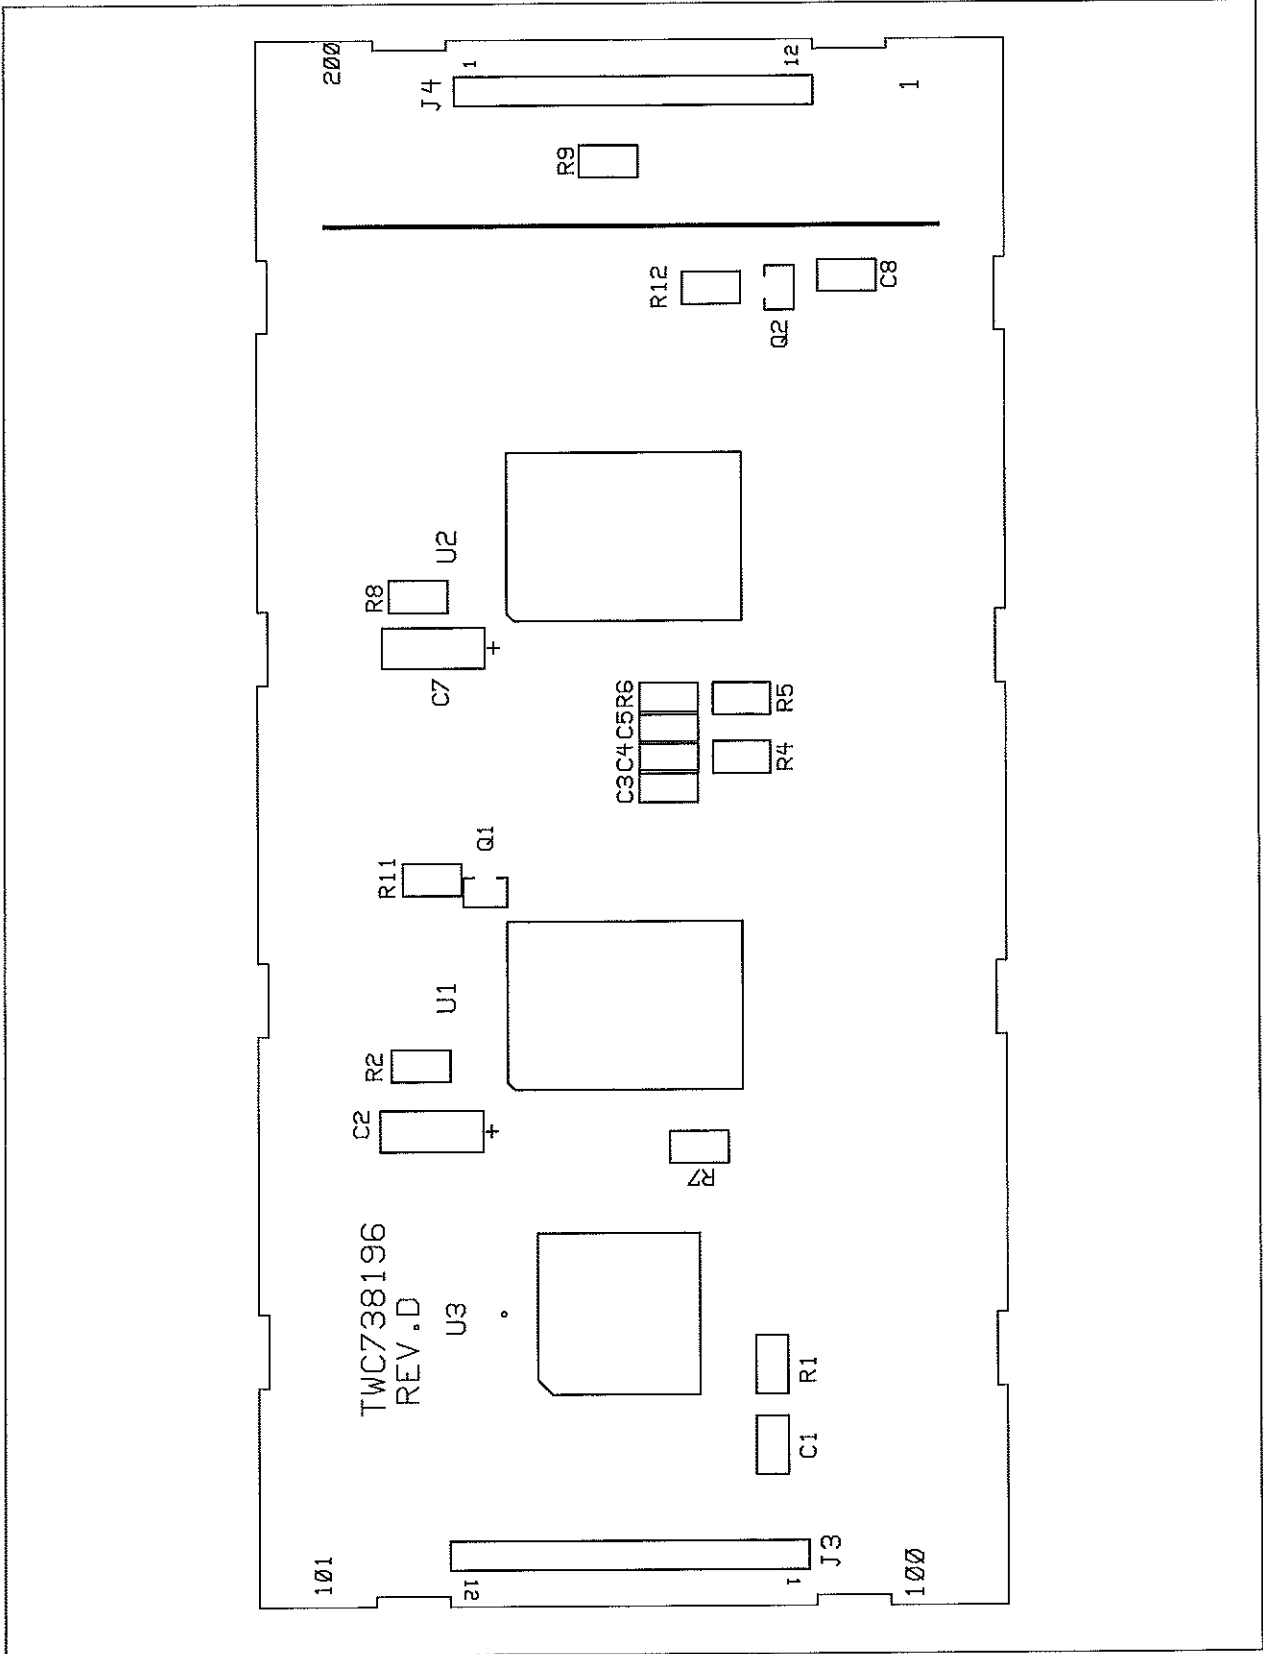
LCD/Driver Board Component Locations (738196 Rev. D)
